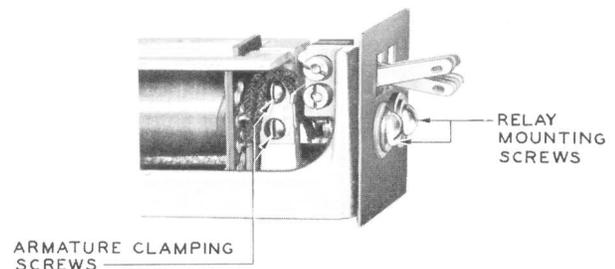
280-Type Relay - Partial Side View With Shell and Cover Cap Removed
